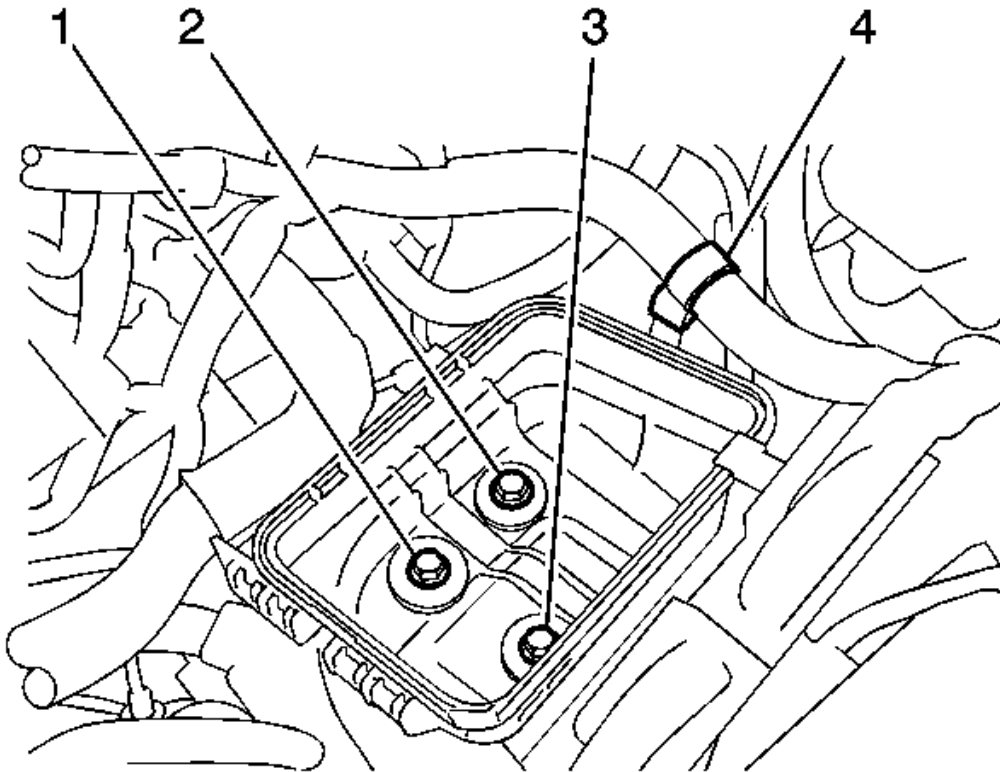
Identifying Air Cleaner Case & Engine Wire Harness Clamp
